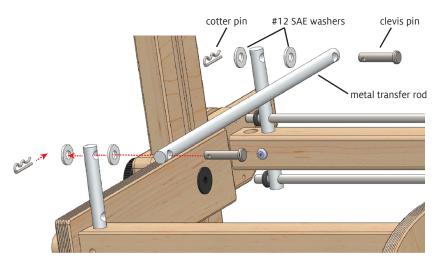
INSTALL THE METAL TRANSFER ROD
